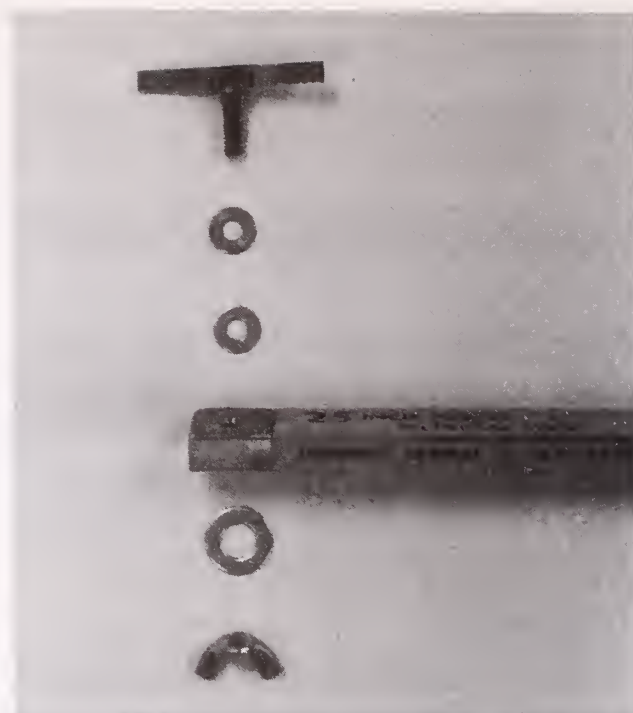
Finished crossarm in proper sequence for mounting on Biltmore Stick.
